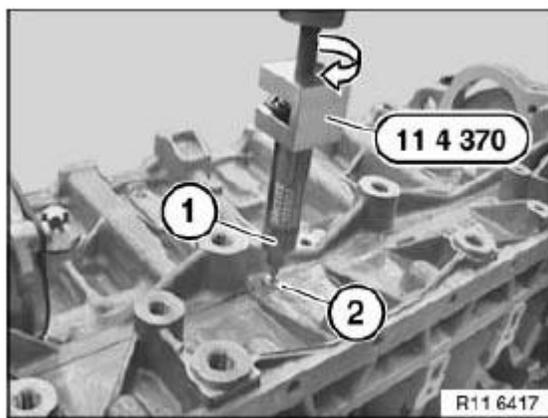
Inserting Liquid Sealing Compound Using Special Tool 11 4 370
